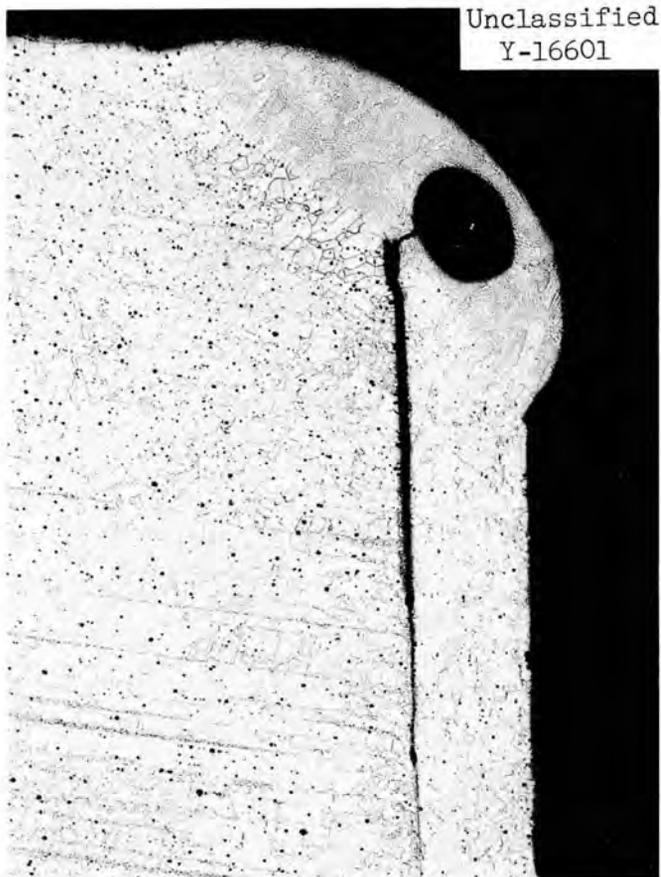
Gross Porosity in Inconel Tube-to-Header Weld. Etchant: Oxalic acid-electrolytic. 24X.
